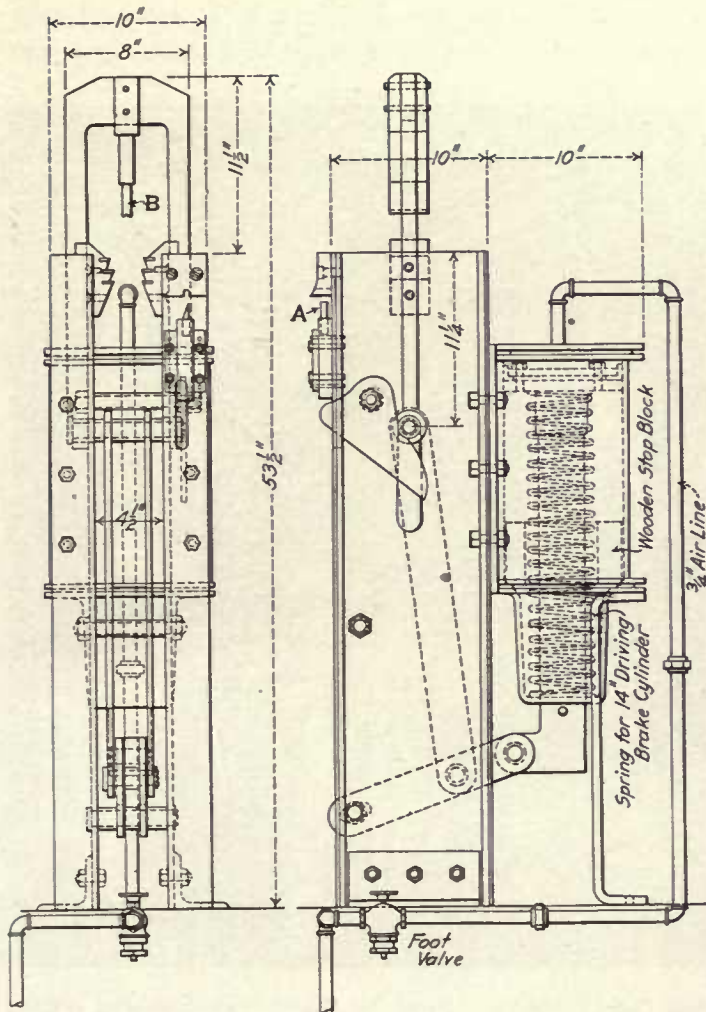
Stripping Machine for Torn Air Brake Hose.
